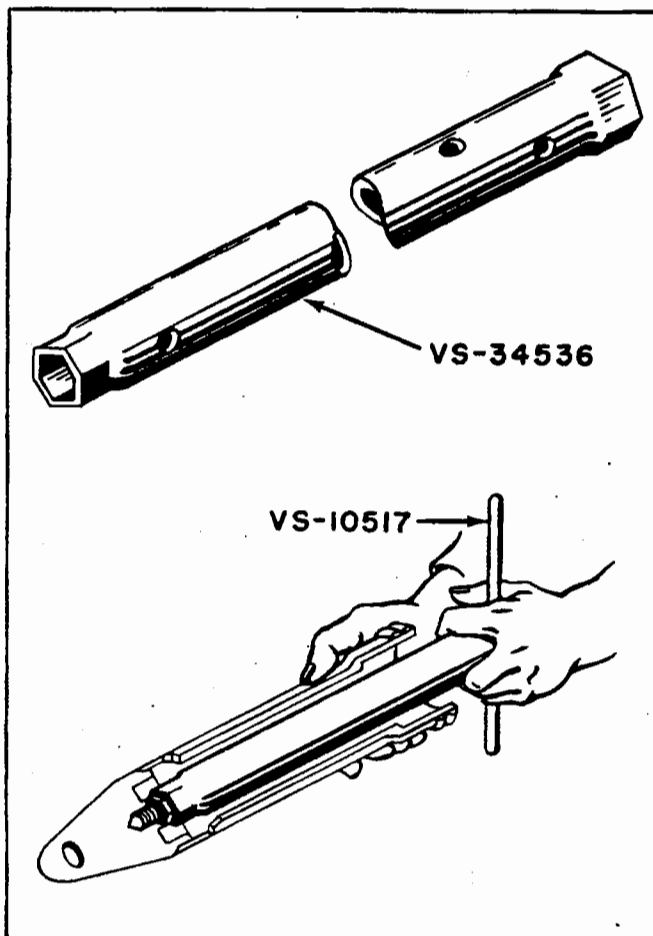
Wrench - Used for Removal of Metering Pin from Tl. Whl. Shock Strut Inner Cylinder Assembly.
